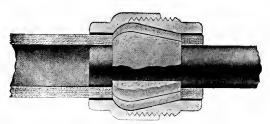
Strong Hose Clamp. Strong, Carlisle & Hammond Company.
